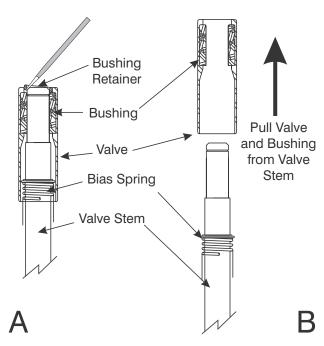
Remove Retainer from Valve and Valve Stem.
